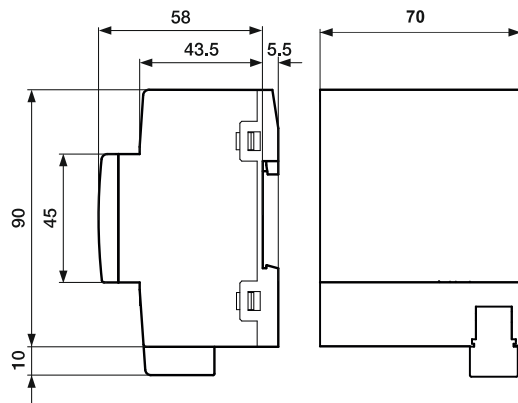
Dimensions of 4-fold switch actuator MDRC (specifications in mm)
